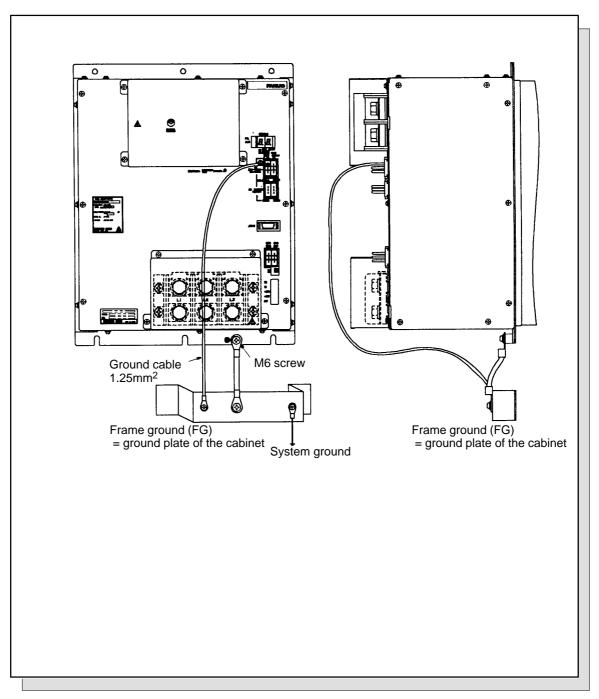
(c) Ground Cable Connection (PSM-45, 75HV)
